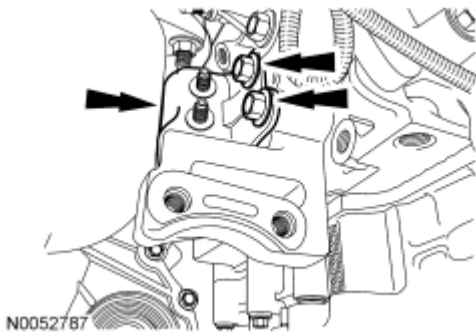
Locating Catalytic Converter Band Clamp LH Half Nuts
